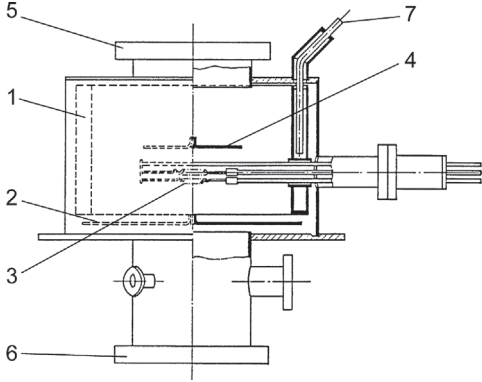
Section of the titanium evaporation pump shown in Figure 11.17 (diagram). 1 Cylindrical, cooled getter screen, 2 screening plate cooled by thermal conductance, 3 evaporator coil, 4 screening plate, 5 connector for vacuum vessel, 6 pump connection, 7 LN₂ feed line.
